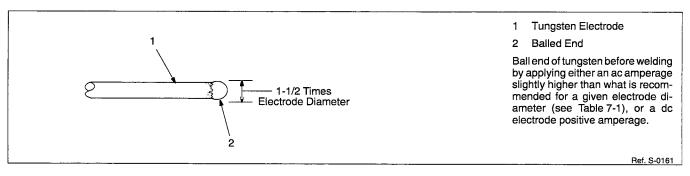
Preparing Tungsten For AC Or DC Electrode Positive (DCEP) Welding
